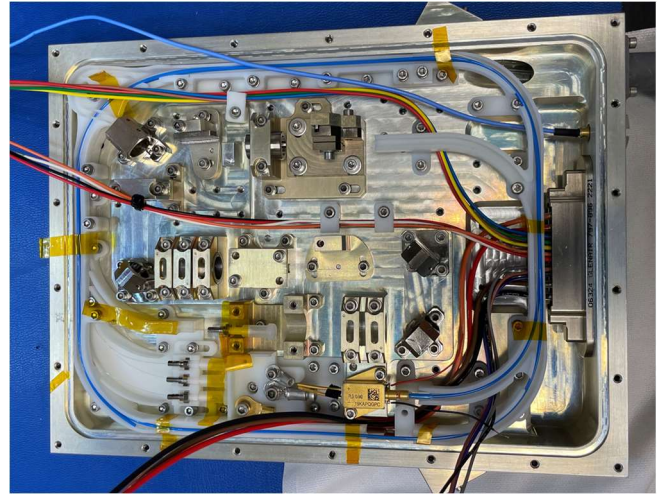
iSEE engineering test unit laser during assembly and electrical harness routing and integration.
